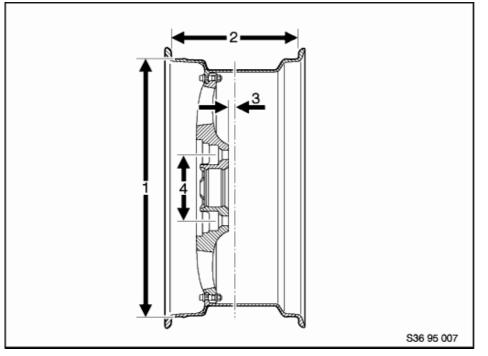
Diameter, rim width, rim offset and hole circle diameter of a disk wheel
